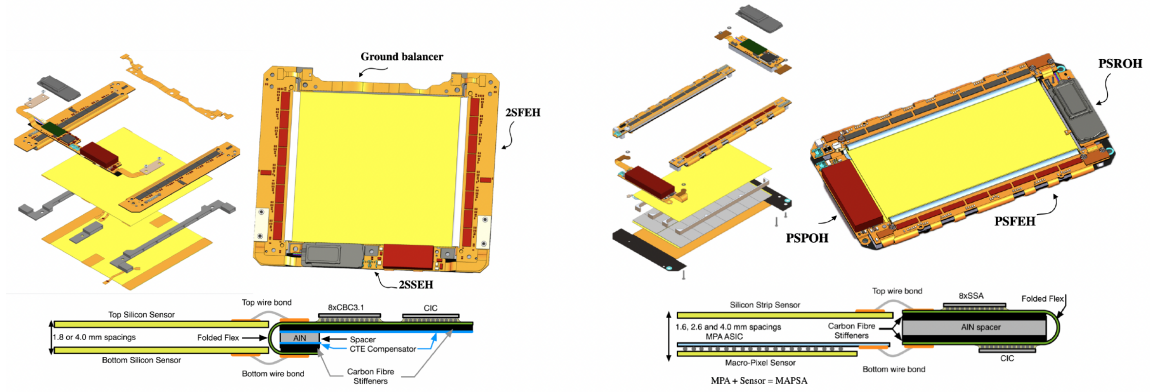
2S (left) and PS (right) module designs, highlighting key components and assembly details.
